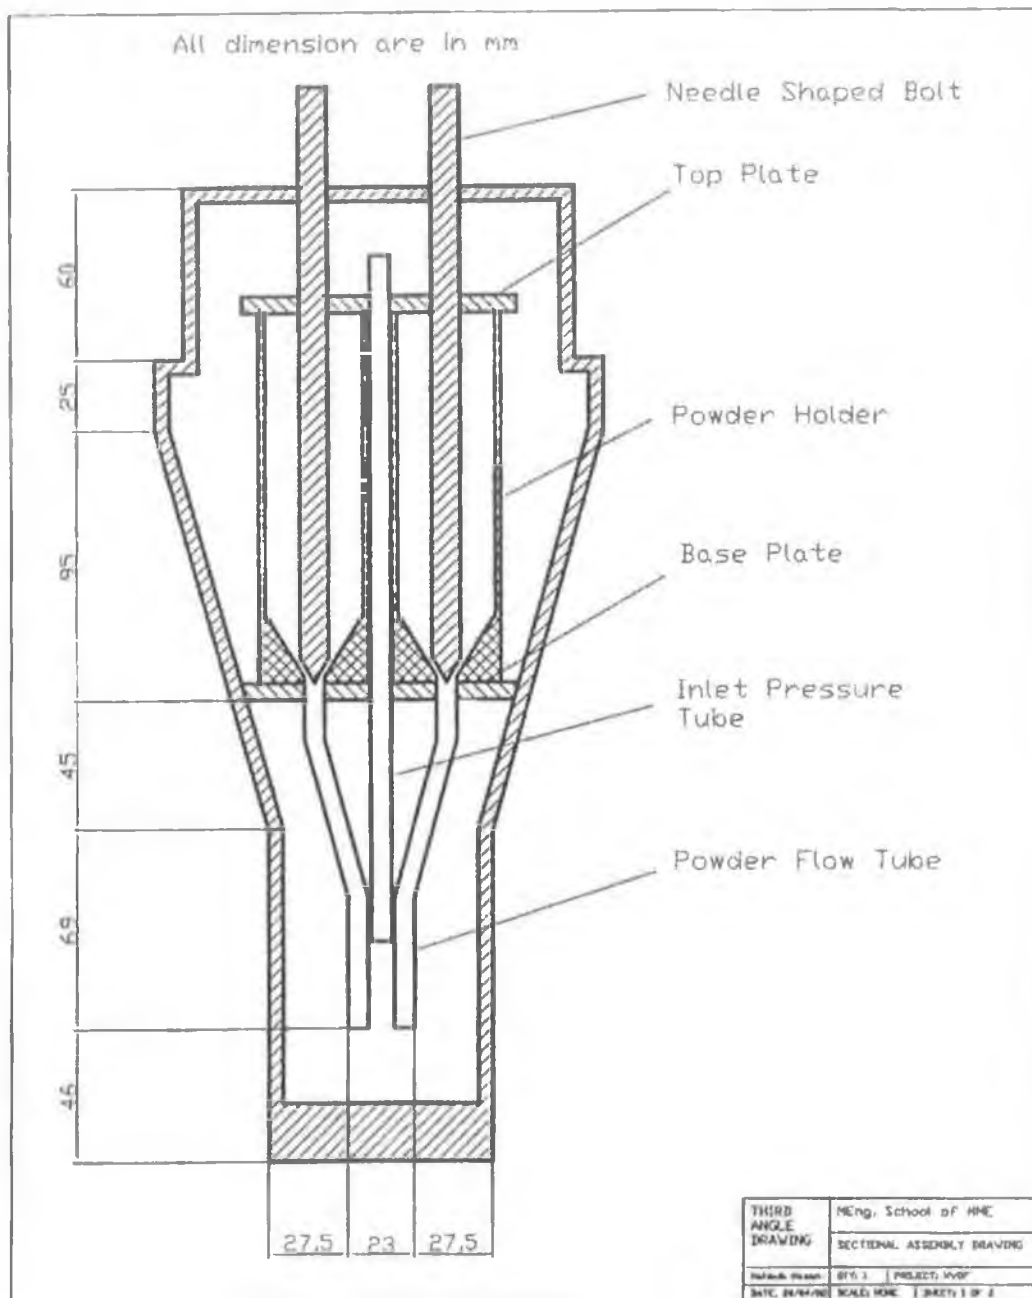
Sectional assembly drawing of the needle shaped bolt, the top plate, the individual powder holders, the base plate, the inlet pressure tube, the powder flow tubes and the powder feed hopper.
